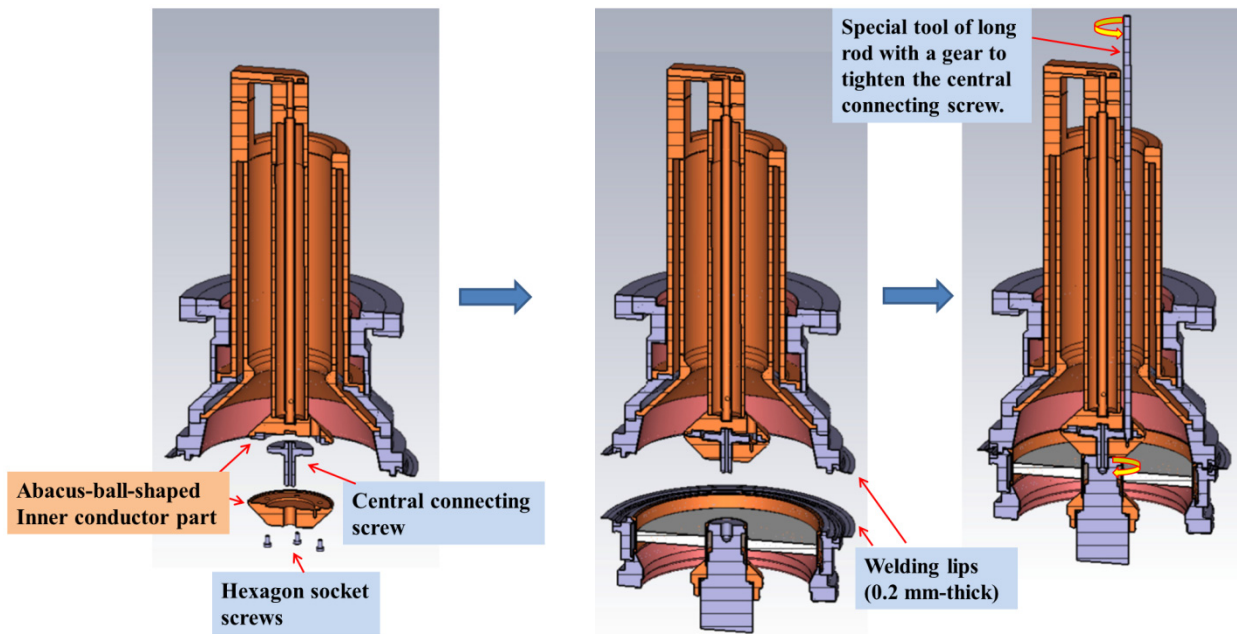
3D view showing how to assemble the coaxial window and the coaxial loop coupler.
